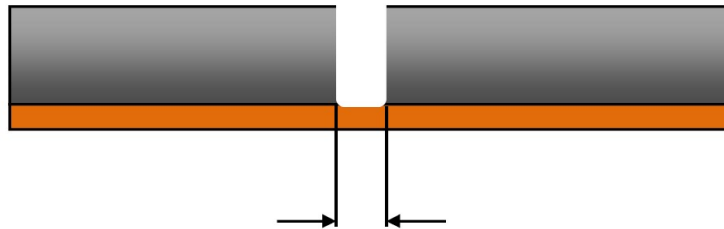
Drilled bore prior to widening and welding, internal diameter 6 mm bigger than bore of the branch connection
